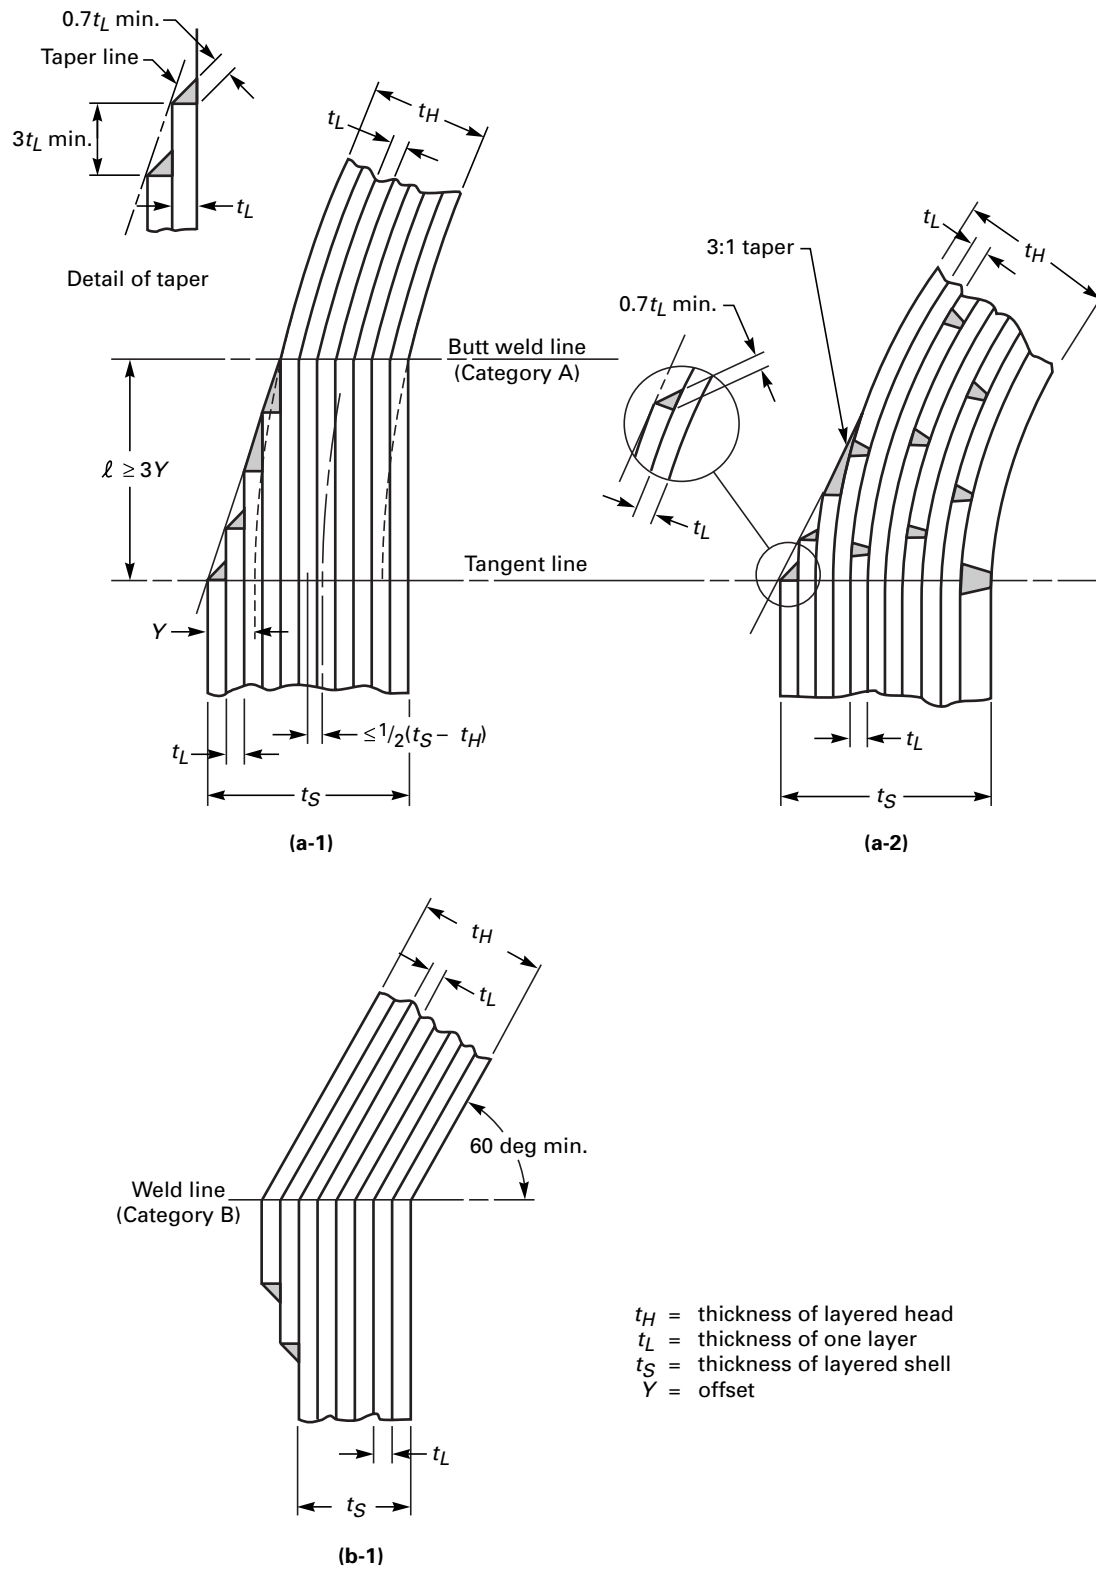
SOME ACCEPTABLE LAYERED HEAD ATTACHMENTS TO LAYERED SHELLS
